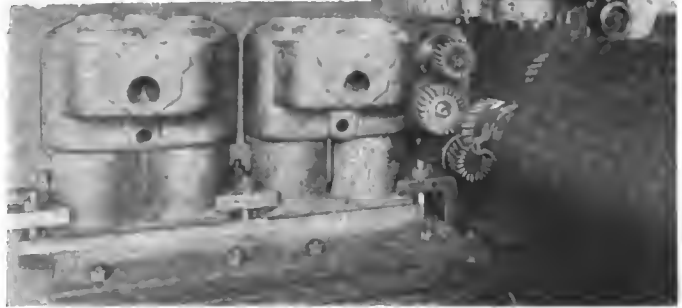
Milling planers engaged in facing two sets of twin cylinders, and engaging nine milling cutters simultaneously
